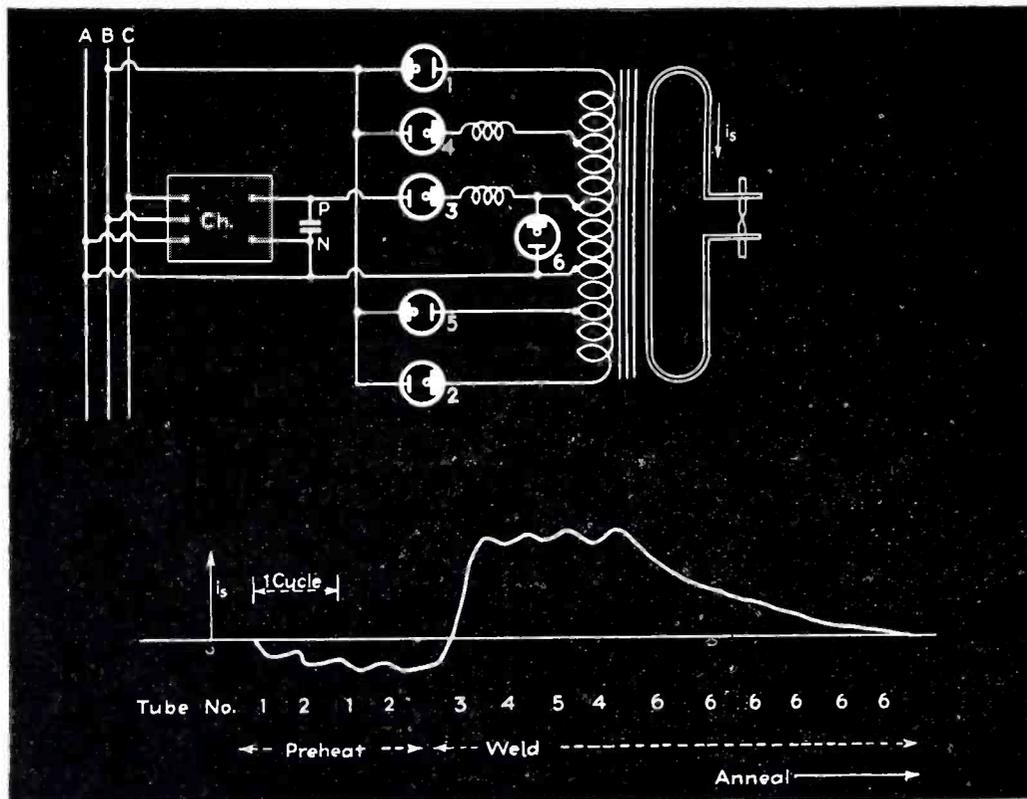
Means of adding direct current to the weld for purposes of preheating
